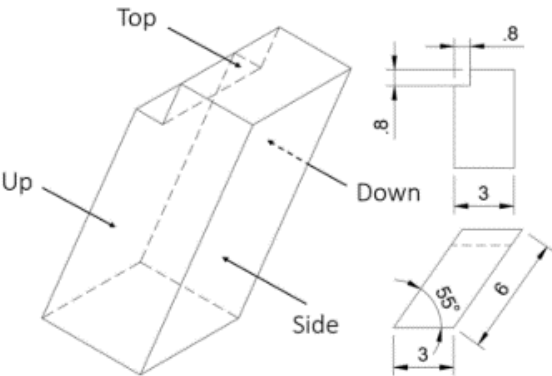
Sample geometry diagram used for roughness measurements: isometric (left), front (top right), side (bottom right) view. Dimensions in mm.
